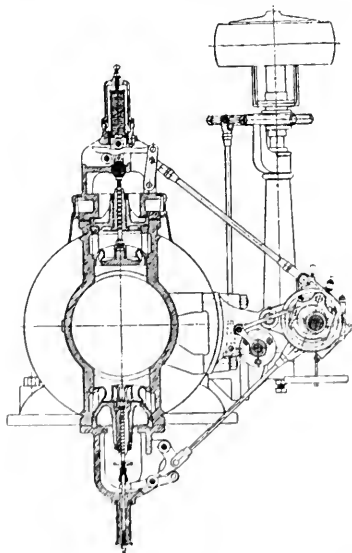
VALVE GEAR OF THE ATLAS PASS-OUT ENGINE
